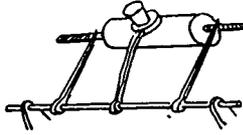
shows an indenting and reproducing apparatus carried back and forward automatically by a double thread, one right hand on the front and left hand on the back of the machine.
